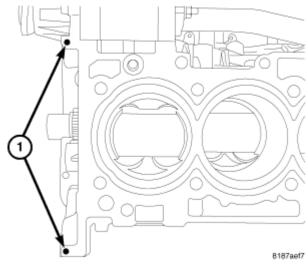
CYLINDER HEAD RTV Courtesy of CHRYSLER LLC
